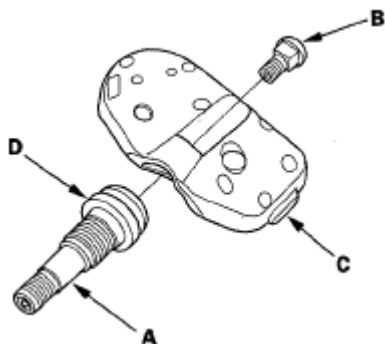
Identifying Valve Stem, Screw And Tire Pressure Sensor
